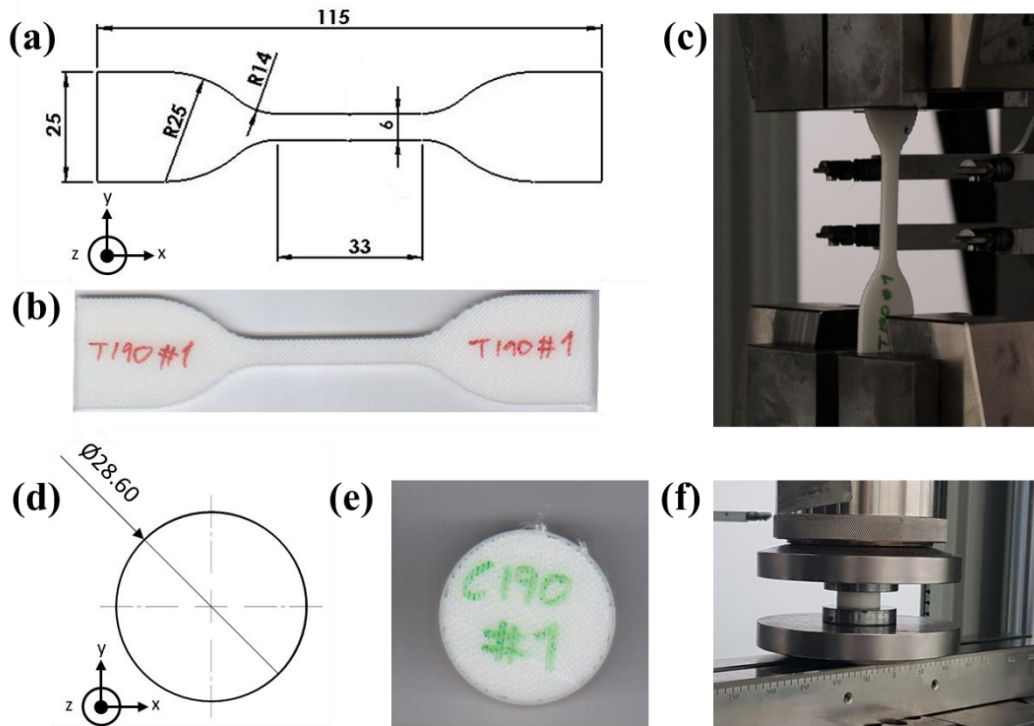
(a) Technical drawing of tensile test specimen. (b) A photograph of tensile test specimen. (c) A Photograph of tensile test setup. (d) Technical drawing of compressive test specimen. (e) A photograph of compressive test specimen. (f) A Photograph of compressive test setup. Thicknesses are 3 mm for the tensile test specimens and 12.5 mm for the compression test specimen.
